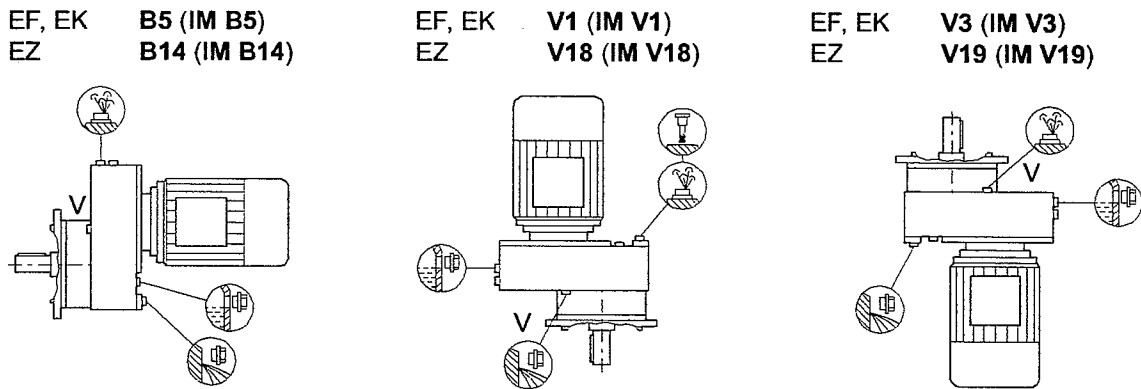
Mounting positions for E.38 - E.148
